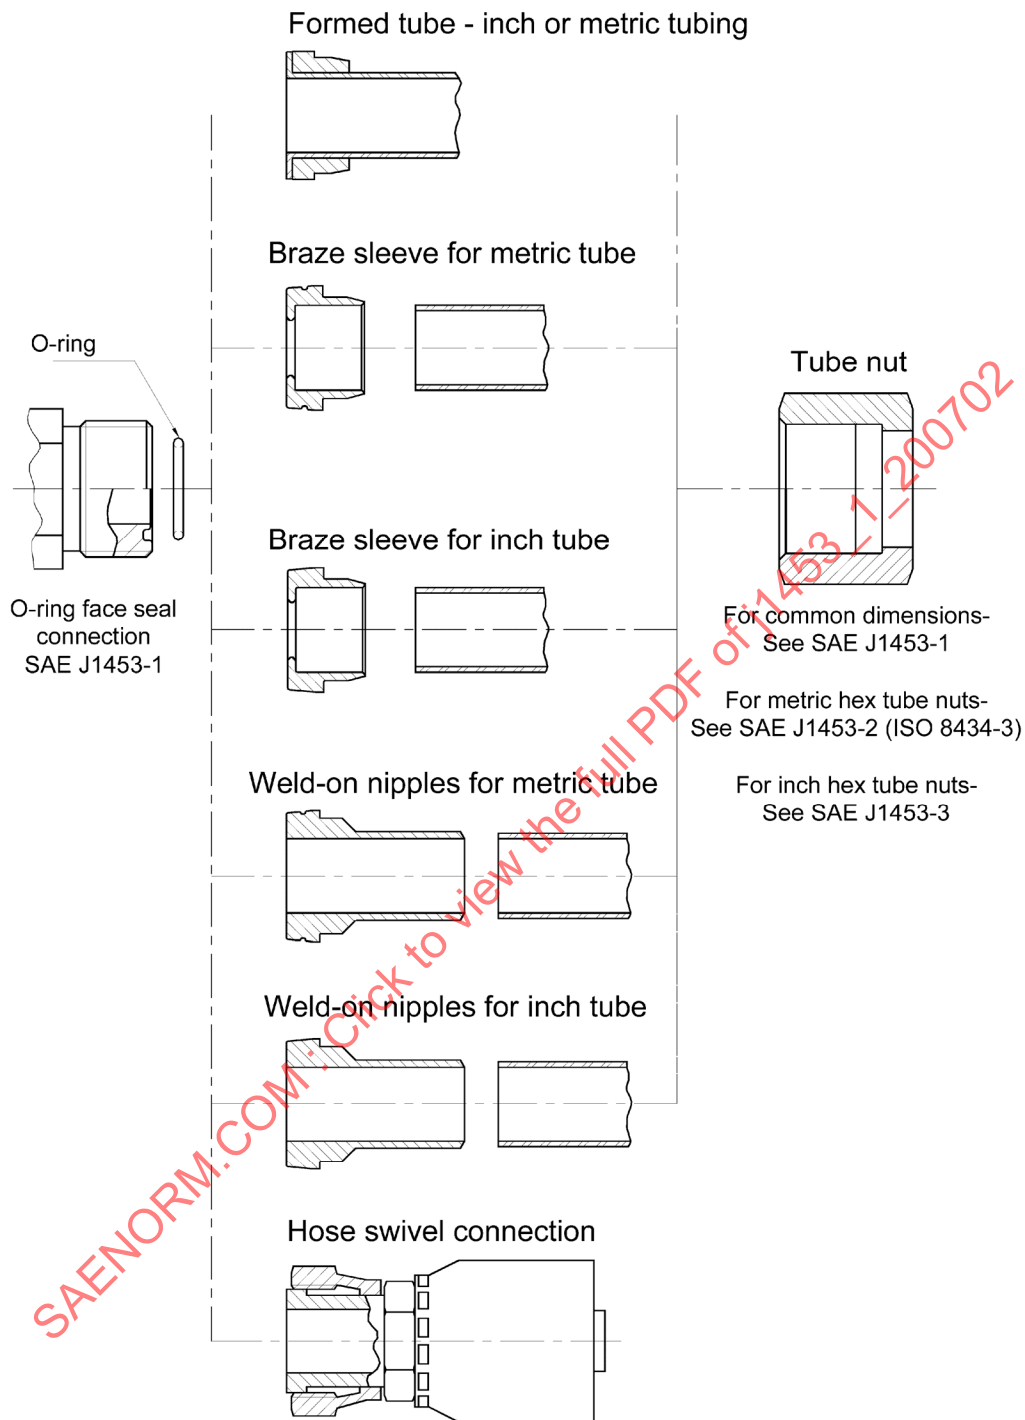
TYPICAL O-RING FACE SEAL CONNECTIONS TO INCH OR METRIC TUBING OR HOSE
